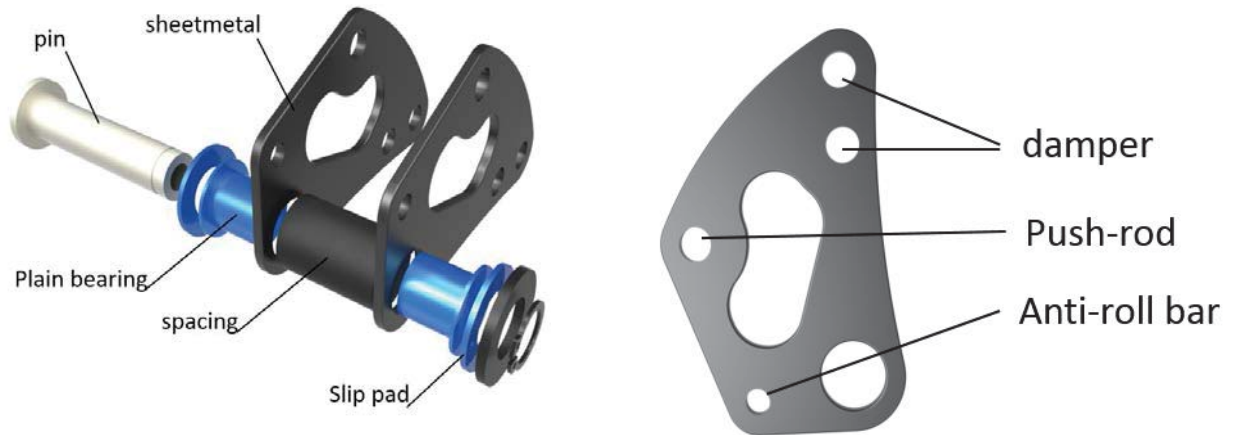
Rear Rocker Assembly. Exploded view. Figure 5.2 Rocker Sheetmetal attachment points
